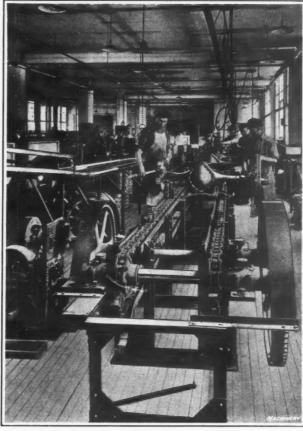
The Palmer-Bee Co. of Detroit, Mich., makes a specialty of designing and installing time- and labor-saving equipments for handling material in course of manufacture. This illustration shows an outfit installed by this company for assembling automobile transmissions. Two strands of endless chain carry brackets which support the work at each end
